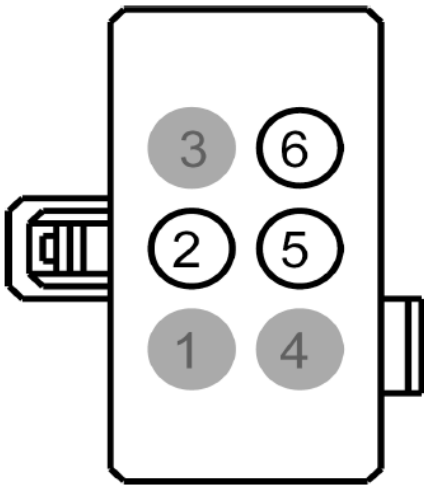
Coil On Plug 6 Connector End View (C1616)
